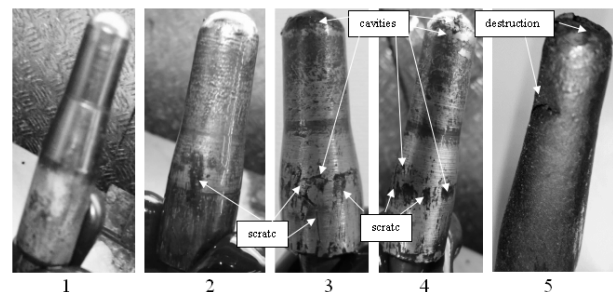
The development of defects in the outer surface and inner volume of the sewing mandrel after the formation of the vessel cavity: 1—250 pieces, 2—500 pieces, 3—750 pieces, 4—1000 pieces, and 5—1200 pieces.
